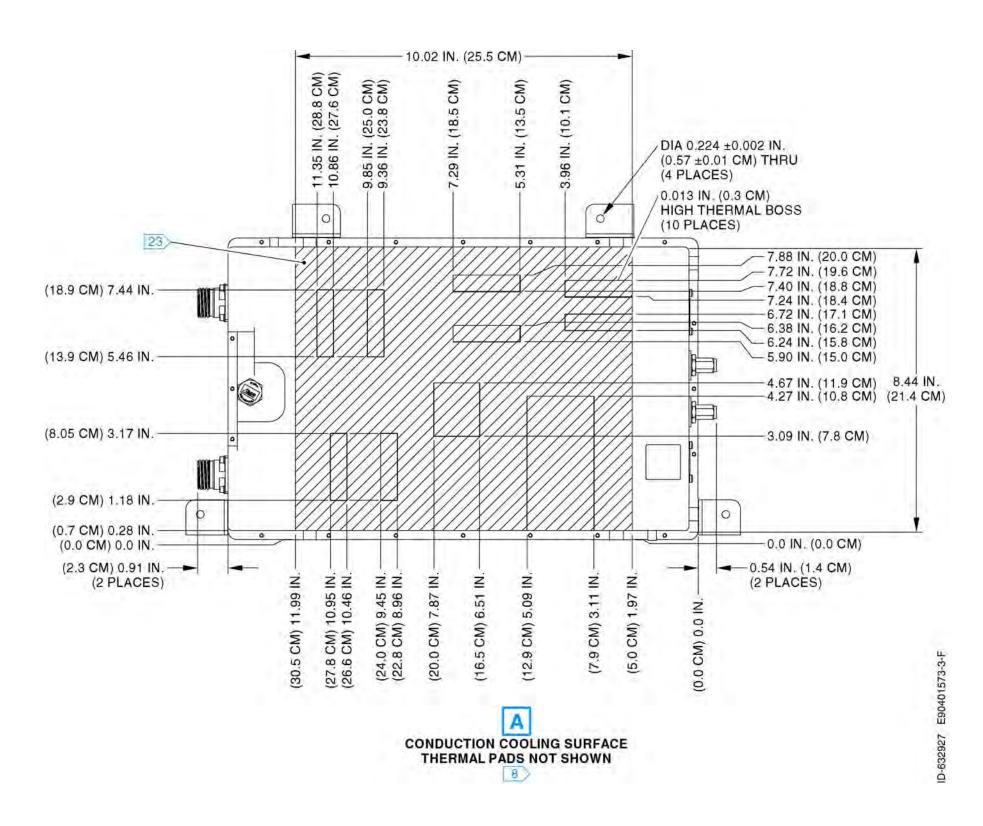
(Sheet 6 of 9) KRFU, Conduction-Cooled 1, Outline and Installation Drawing (90401573, REV F)
